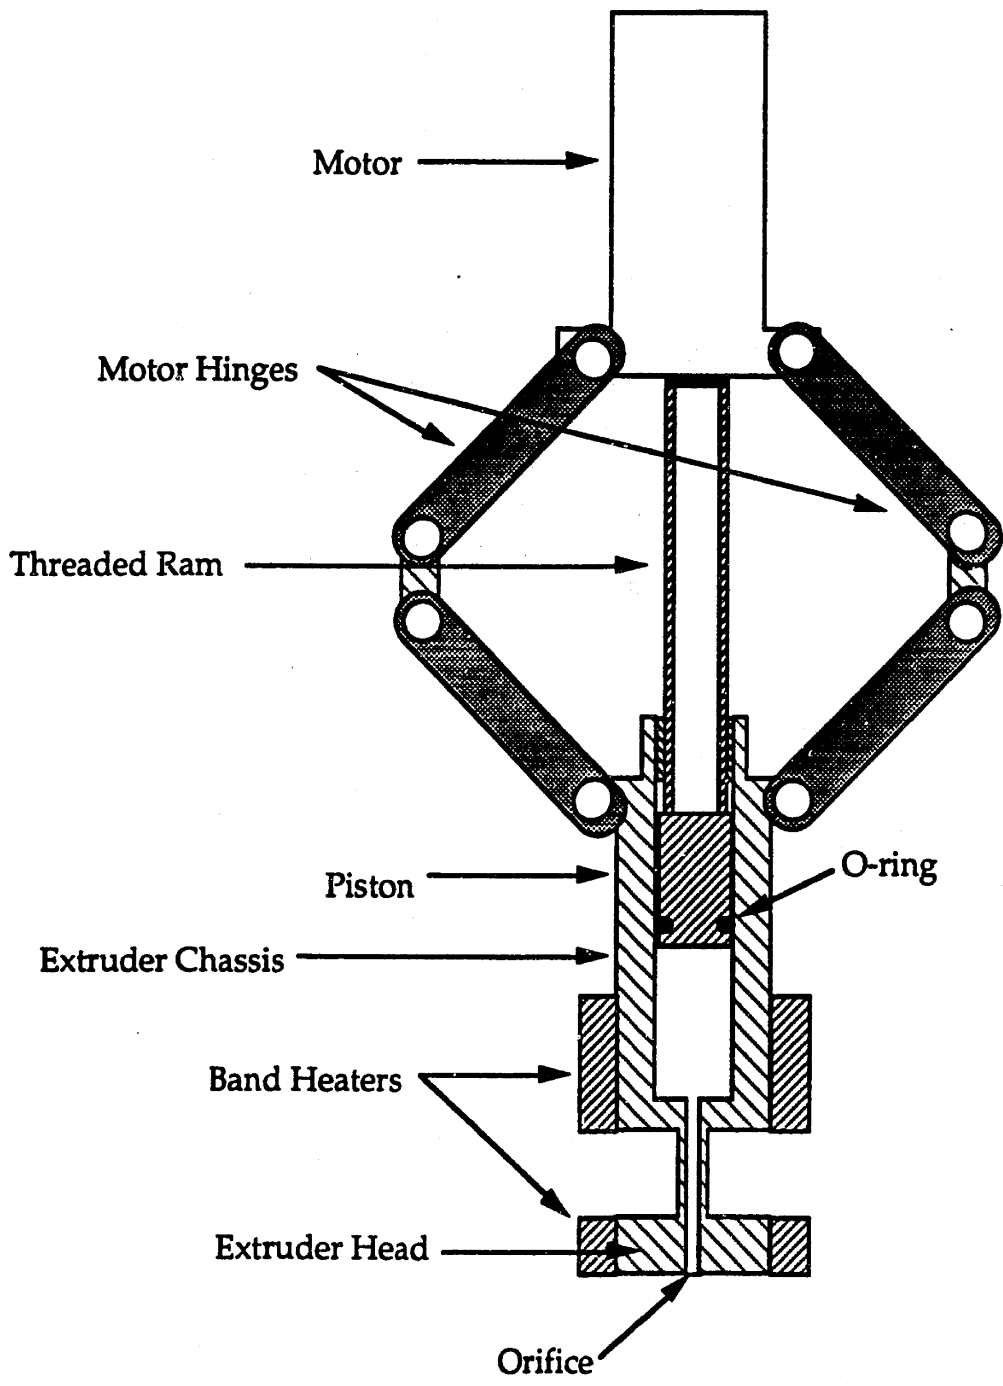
Initial extrusion apparatus with dual band heaters, piston with O-ring, and separate extrusion head.
